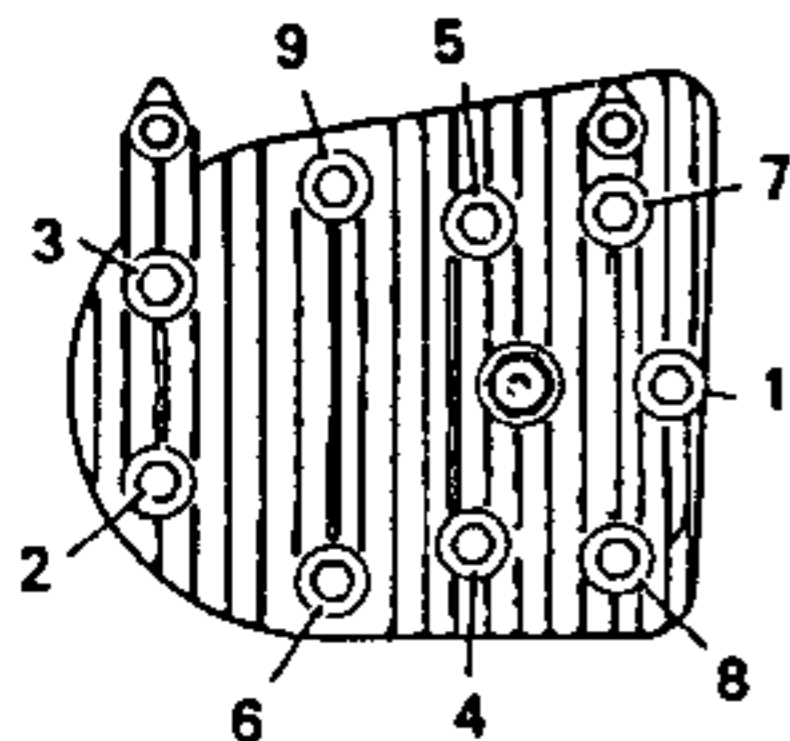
Tighten cylinder head cap screws on Models HM80, VM80, HM100 and VM100 in sequence shown to a torque of 180 in.-lbs. (20 N·m).
